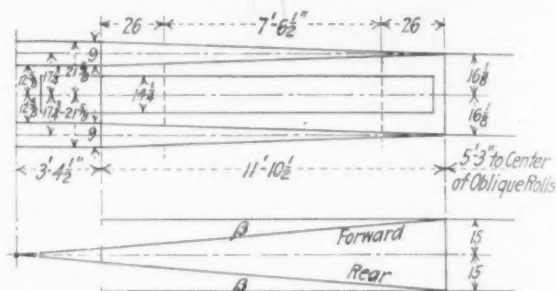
Spindle Positions of a 22-in. Oblique Rolling Mill
